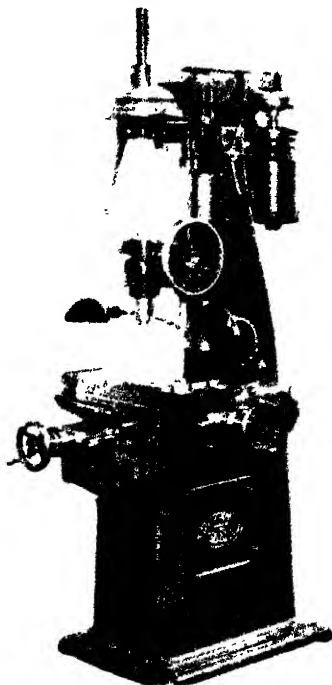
The Moore No. 1 jig borer. (*The Moore Special Tool Company*)
